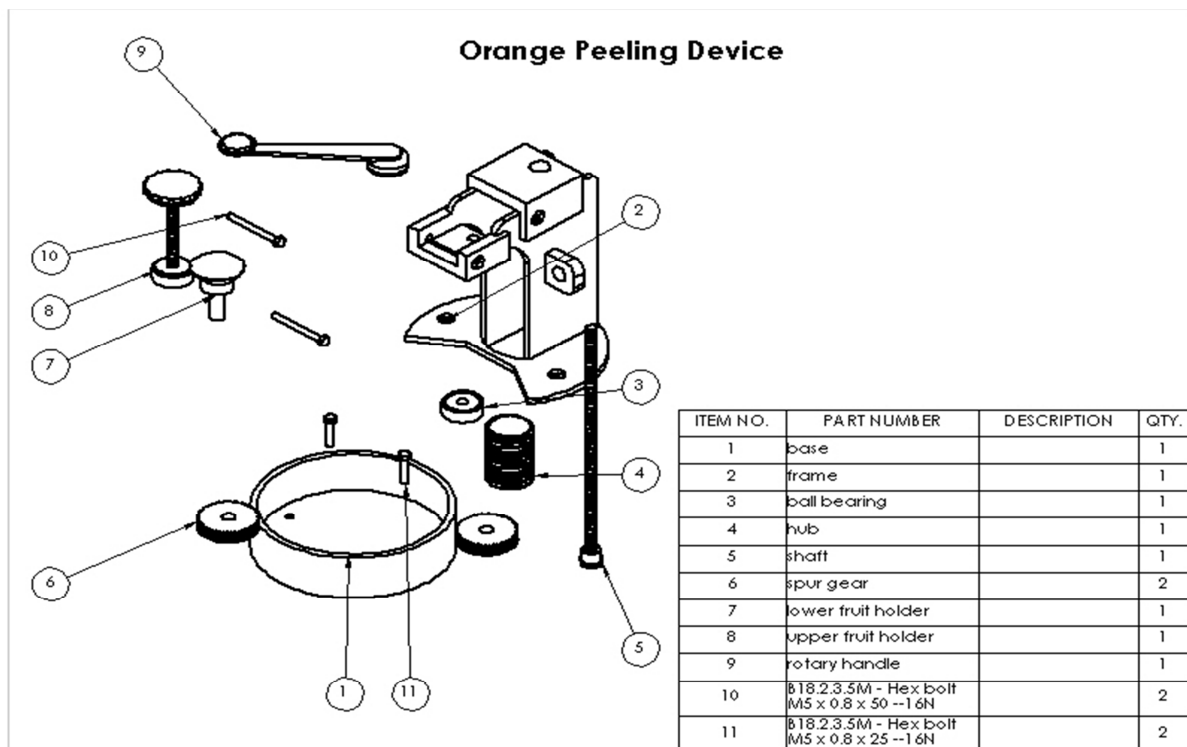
Assembly drawing of the upper section of peeling device showing its different parts and interlinkages with the other components.
